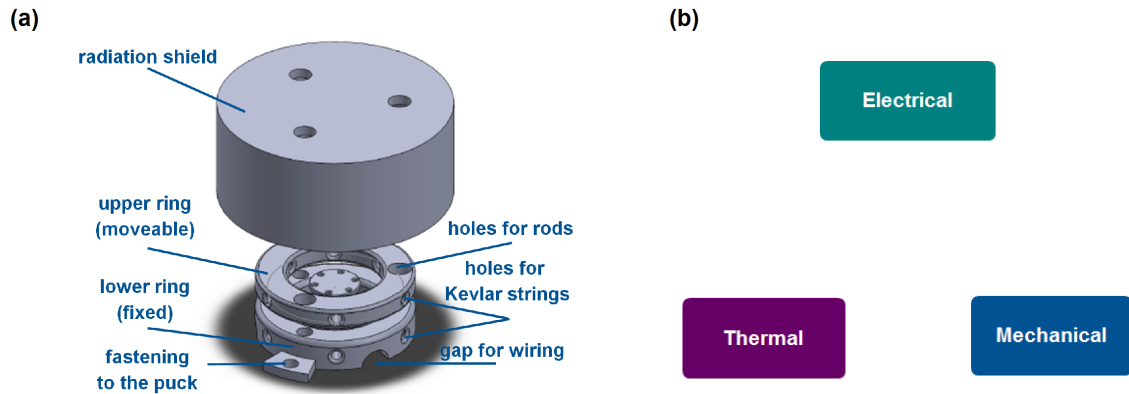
Drawing of the Kevlar setup components designed in SolidWorks (a). Electrical, mechanical and thermal contact are all decoupled (b).
